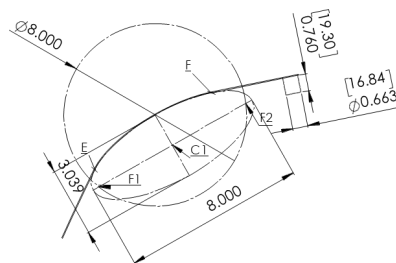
2D Drawing of ellipse detail and dimensions in inches and [millimeters].
